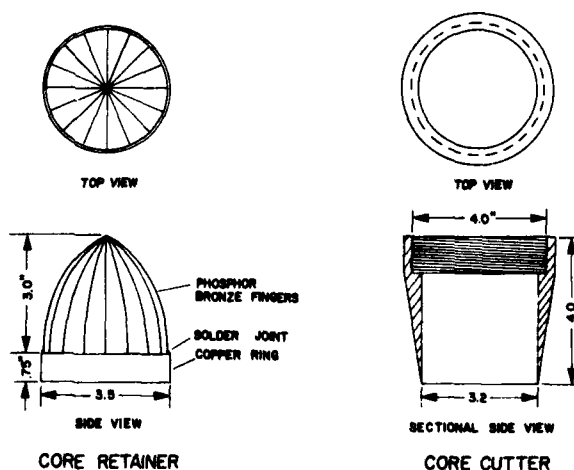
Core retainers and cutters used with the large diameter piston corer.
